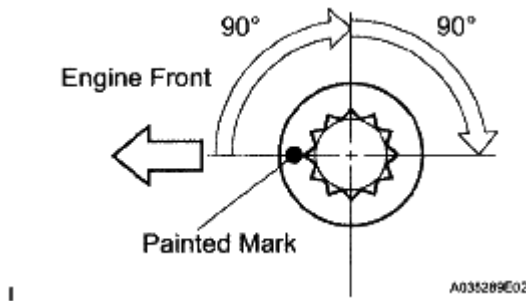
Identifying Cylinder Head Bolt Head Paint Mark
